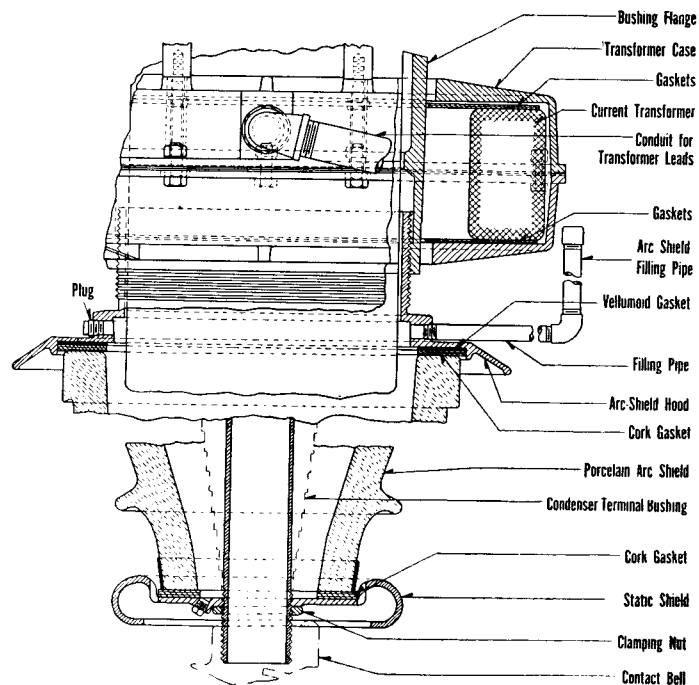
187,000-VOLT, ARC SHIELD ASSEMBLY
